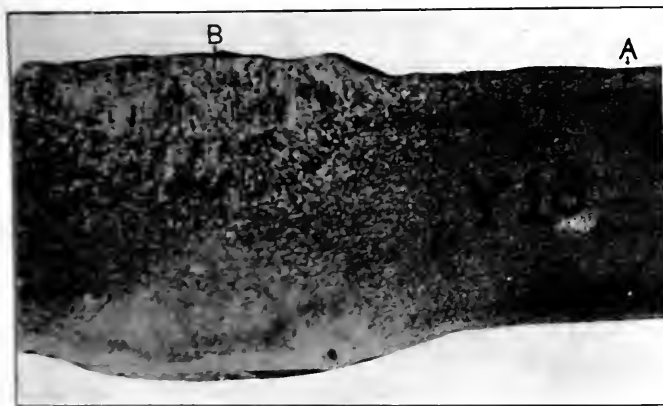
CRACK IN BOTH PLATE AND WELD OF SPECIMEN B; MAGNIFICATION 3.2
